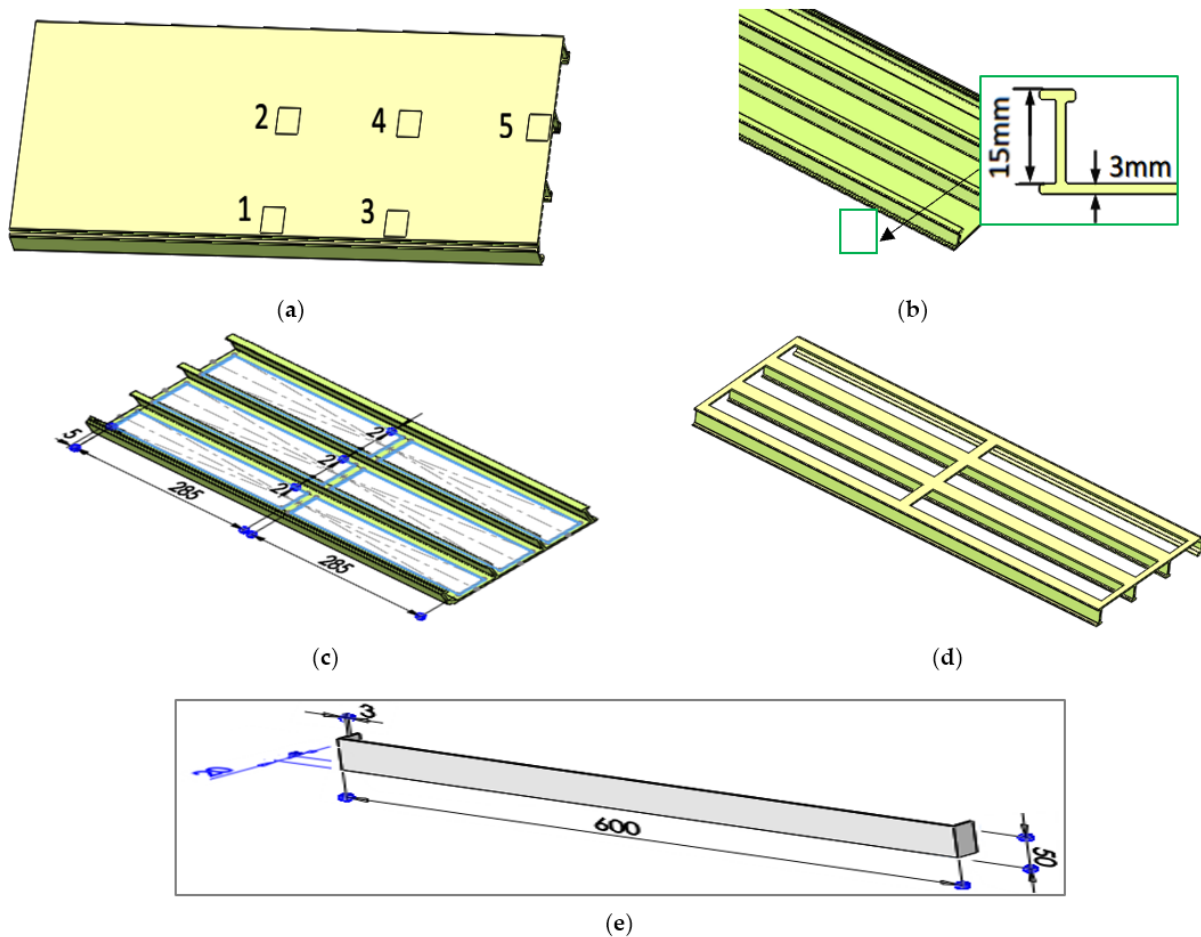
Components of the raised flooring product (units: mm). (a) Upper panel (top view); (b) upper panel (back view); (c) lower panel (top view); (d) lower panel (back view); (e) stringer.
